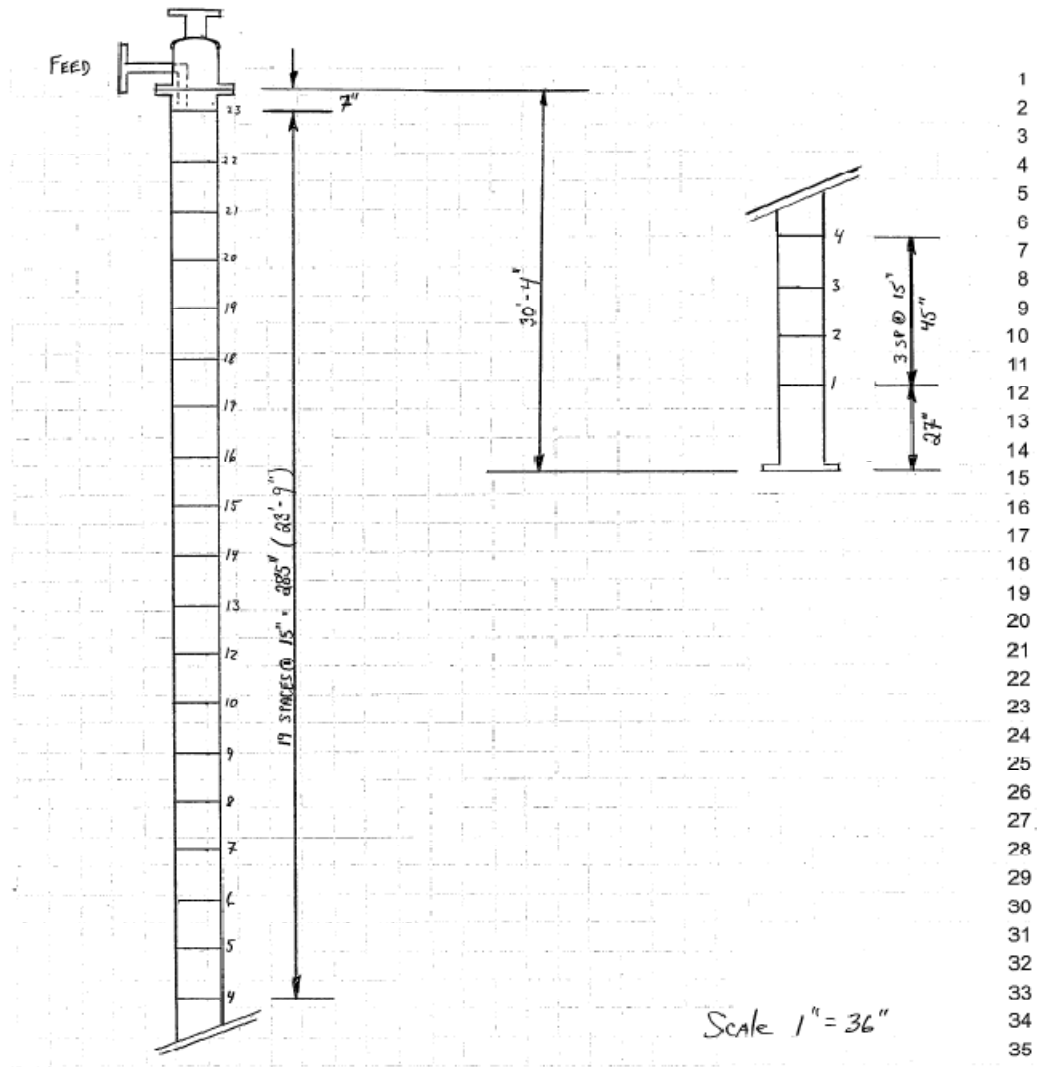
Column Design: (a) Rectifier detailed dimensioned drawing (b) Beer Still design
